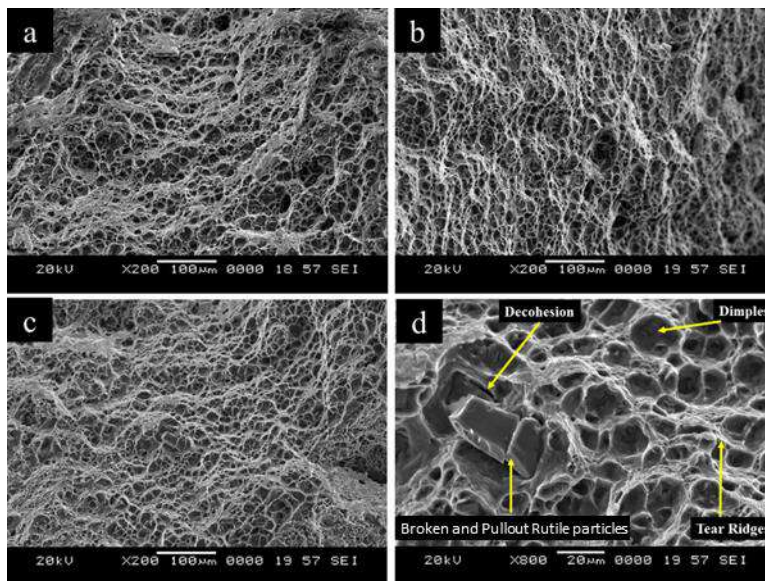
SEM image of a fractured surface of AA6061-3 (wt%) Rutile composite joints friction stir welded using TC tool (along the weld direction) at a constant rotational speed of 1000rpm and a) welding speed of 60 mm/min, b) welding speed of 75 mm/min, c) welding speed of 90 mm/min, d) higher magnification image showing the dimples, pullout, decohesion, and cracked rutile particles.
